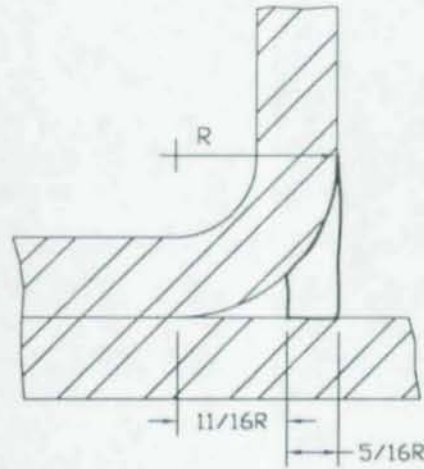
E for Flare Bevel and Flare-V Test Welds
